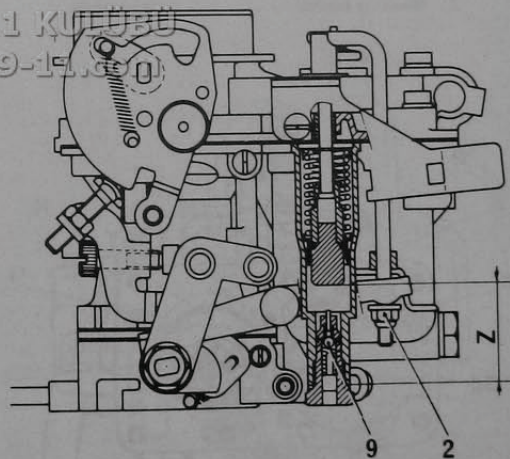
Accelerator pump stroke – Zenith carburettor (Sec 17)
